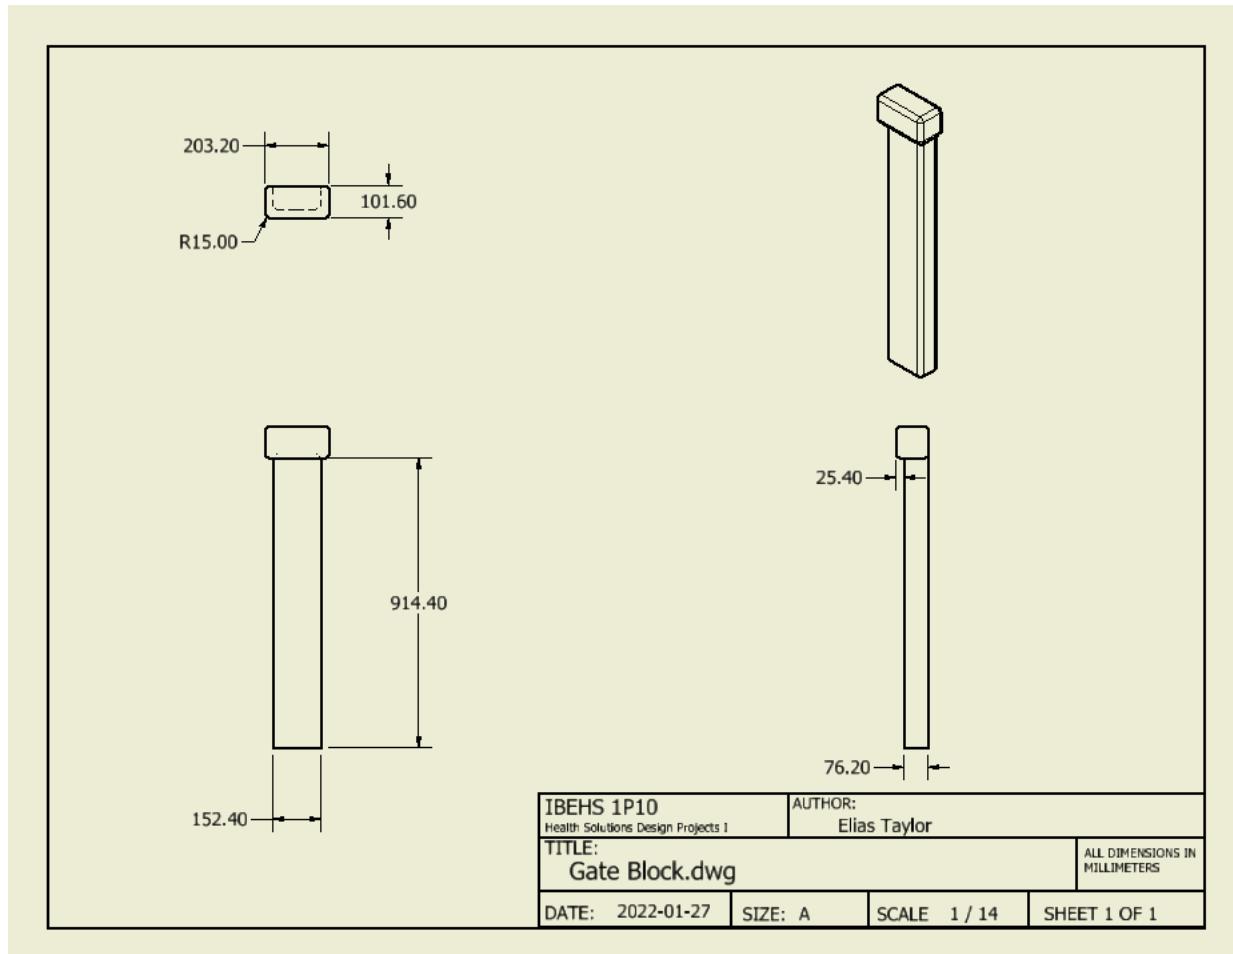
Banister for gate to lock to; would attach to wall or stair banister
